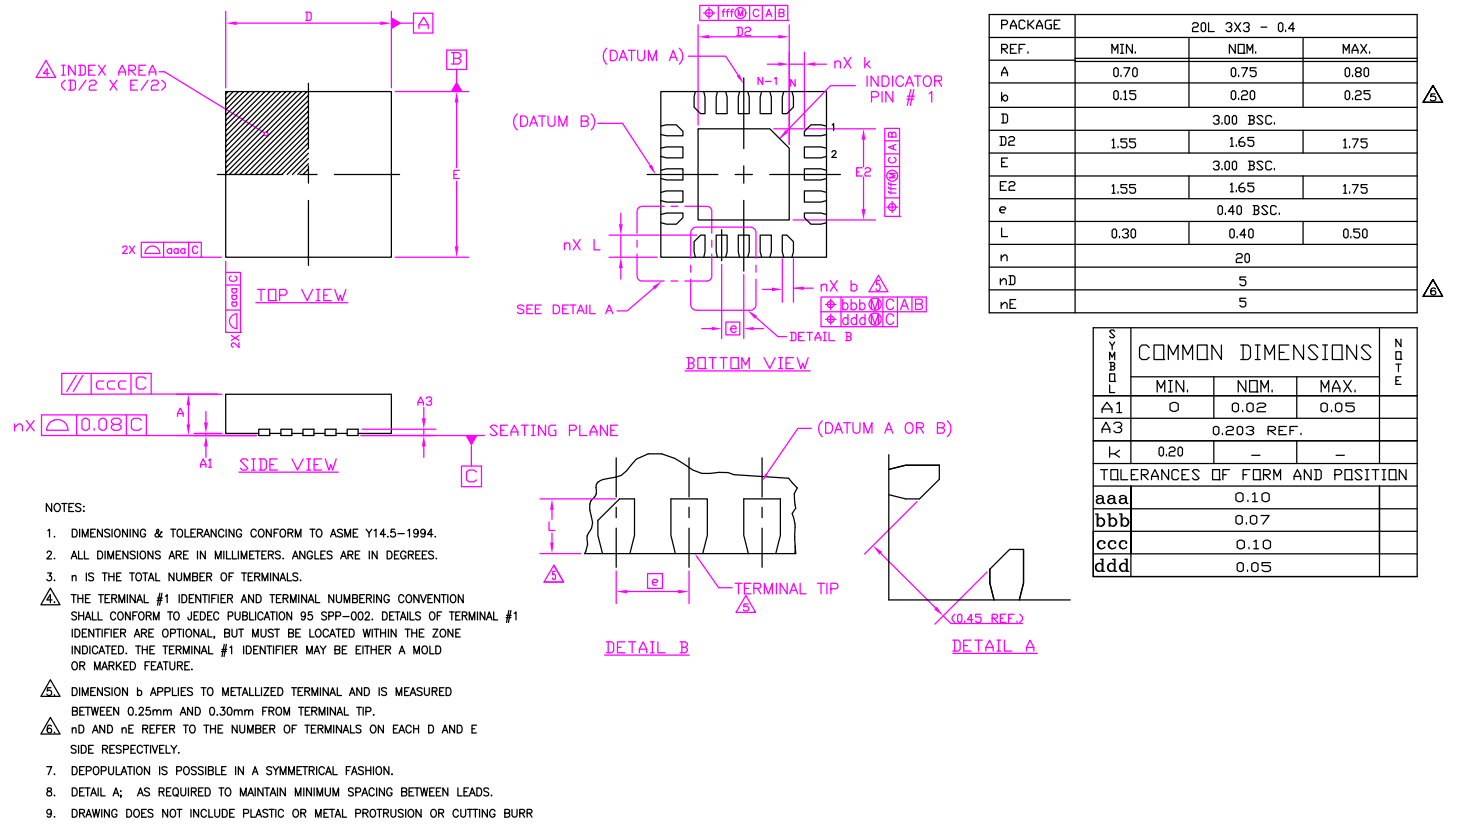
3mm x 3mm, 20-lead, 0.4mm pitch QFN Package Mechanical Drawing (Note: Drawing Not to Scale)
